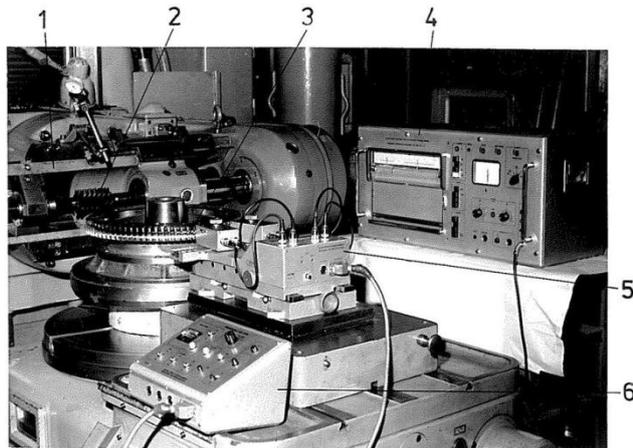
The worm hob and measurement device Dr.HÖFLER installed on a PHAUTER 900S machine tool.
